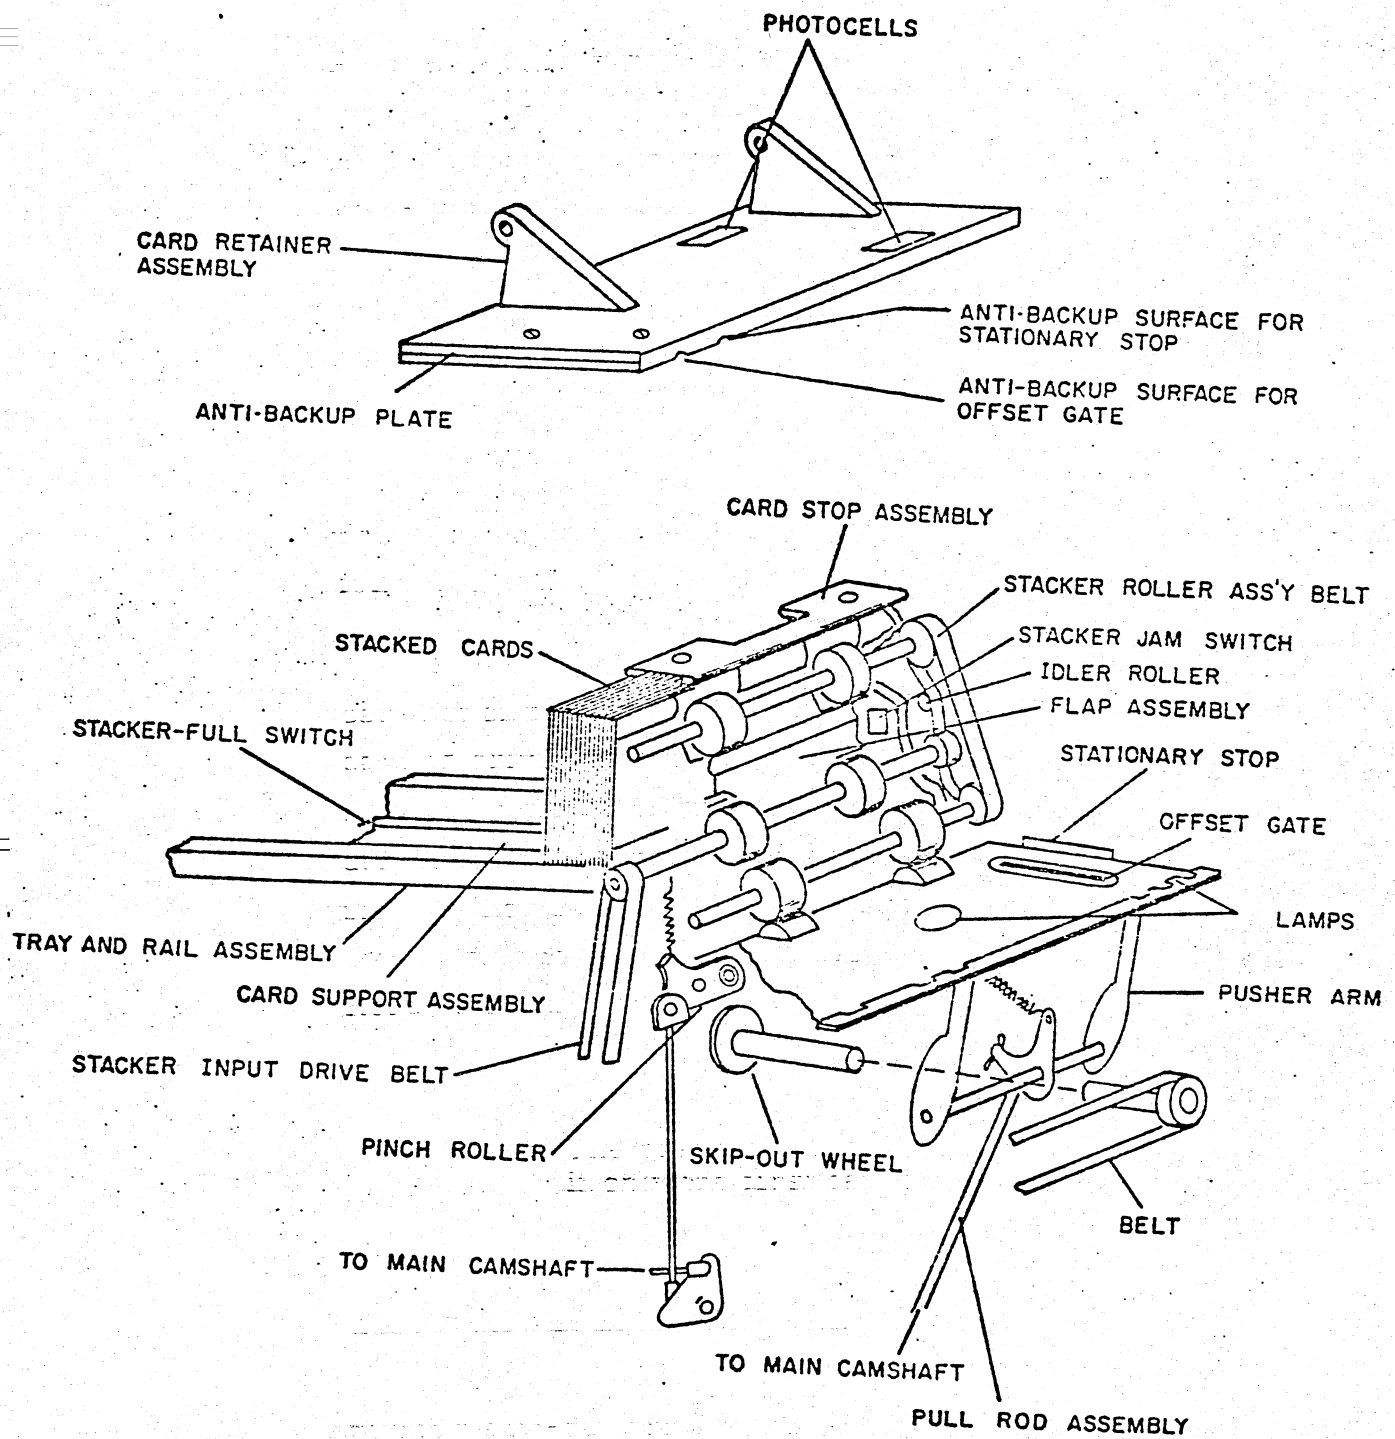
Stacker Routing Assembly, Functional Drawing
